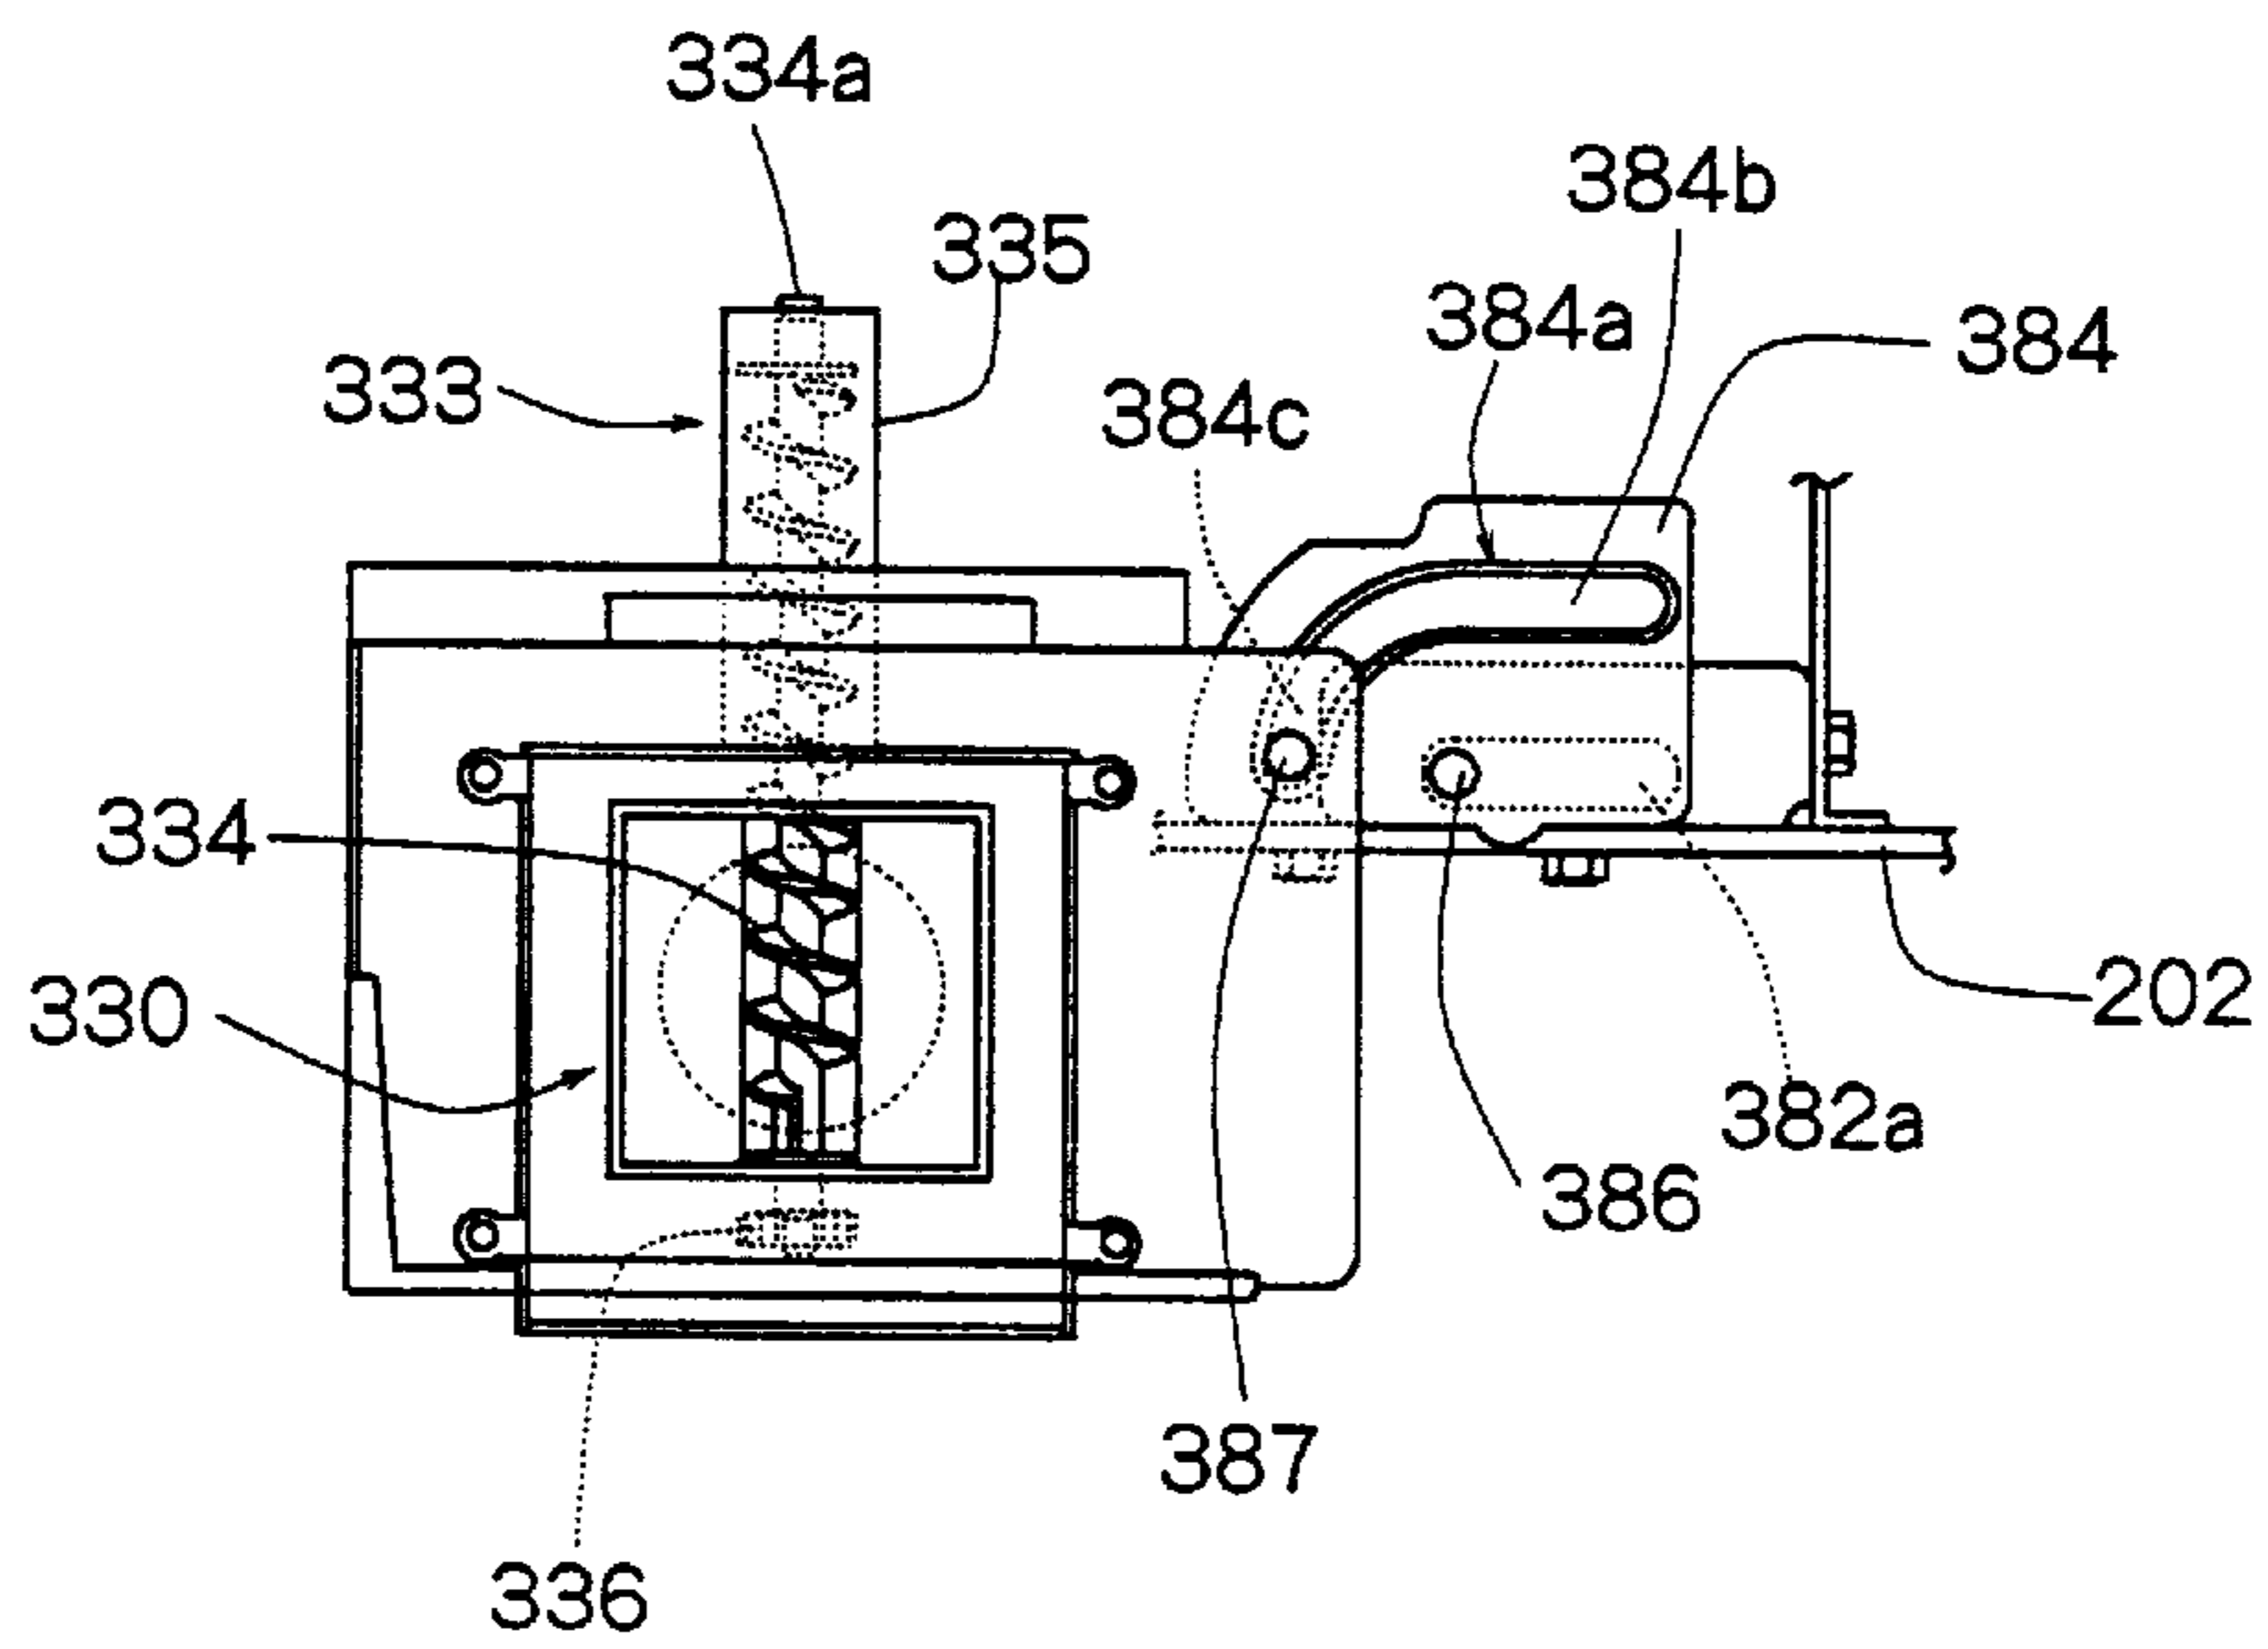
IMAGE-FORMING MACHINE WITH DETACHABLE DEVELOPING DEVICE
